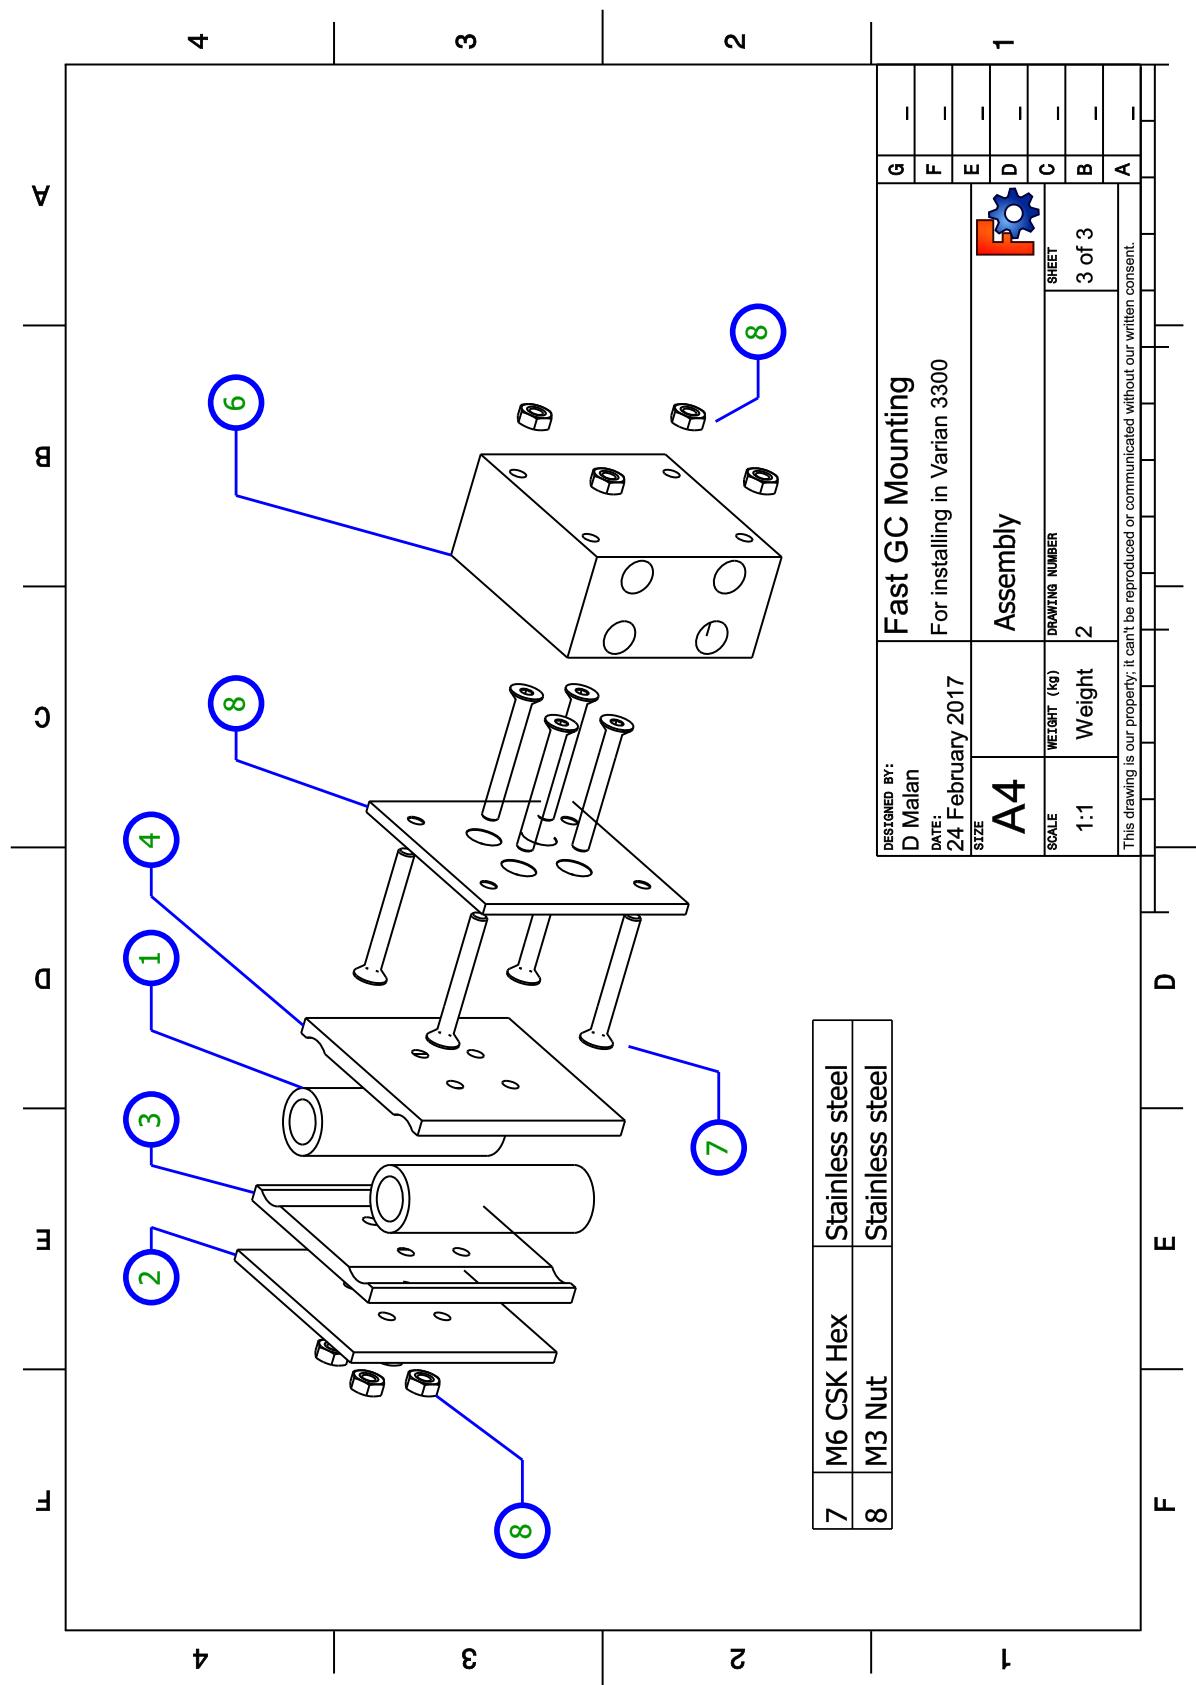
(continued) A technical drawing of the T-piece block mounting, showing assembly method.
